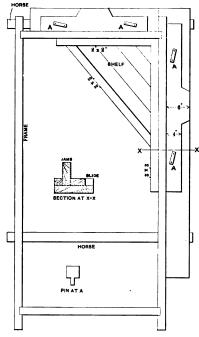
The Frame or Clamp Complete with Details of Construction.
